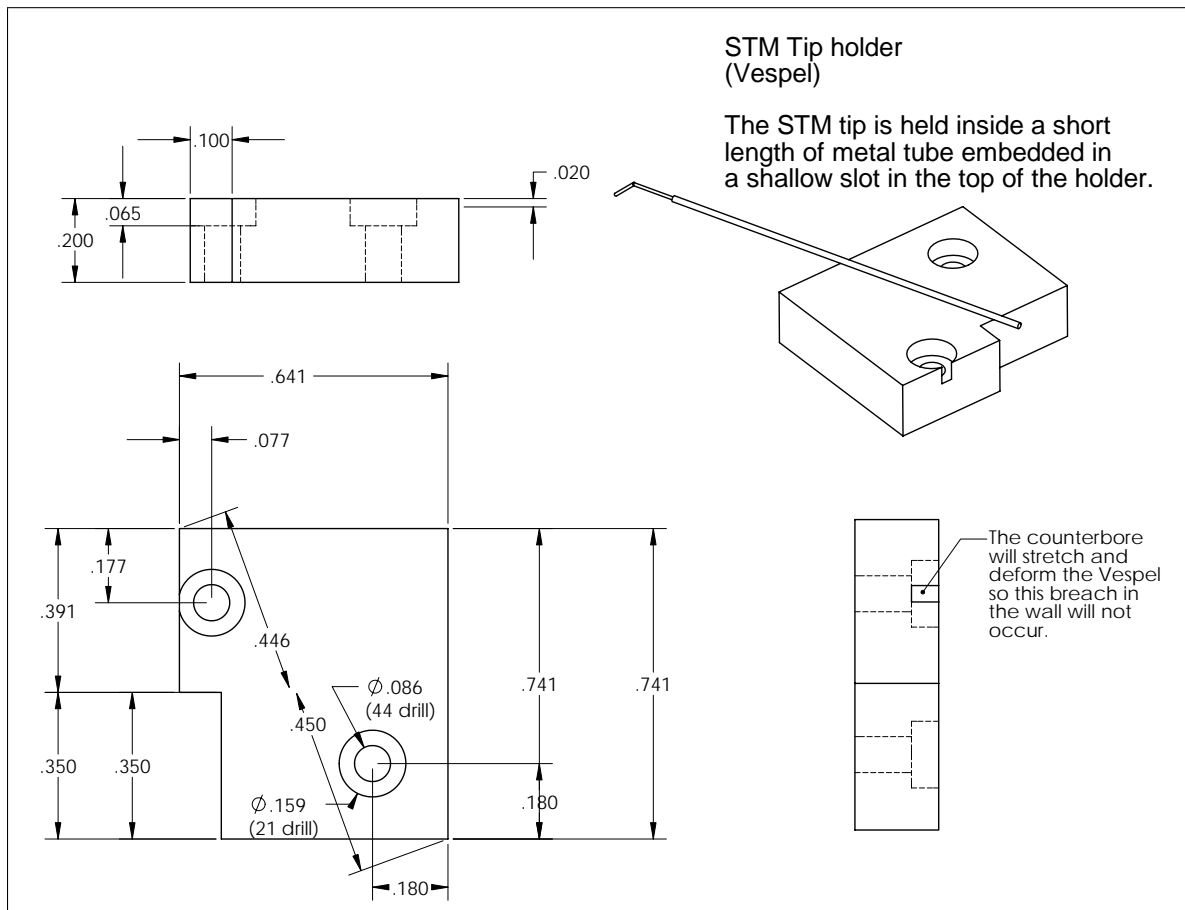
Schematic drawing of the STM tip holder. STM tips are inserted into a hollow metal tube which has been press fitted into a shallow, narrow slot cut into the top of the holder. STM tips should be bent down at an angle for any manipulation work on a flat substrate.
